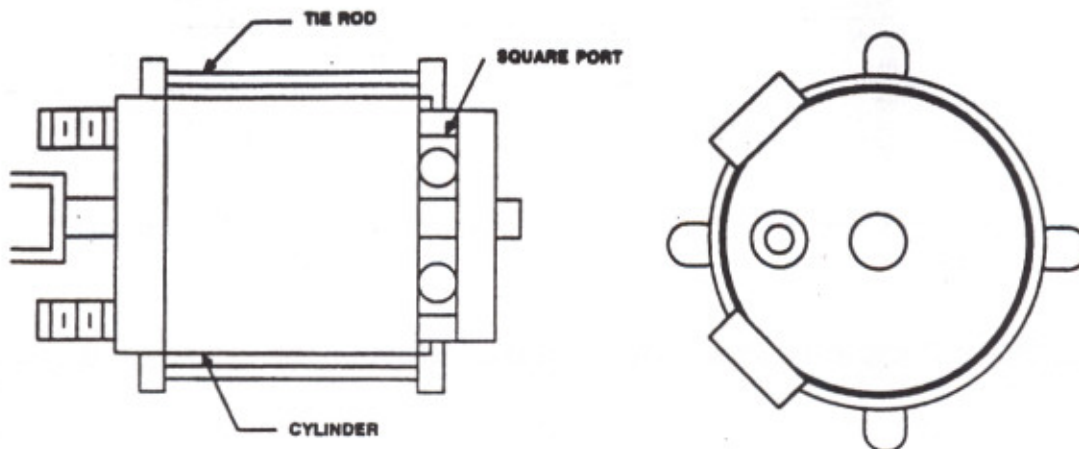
TIE ROD STYLE PISTON BRAKE CHAMBER
